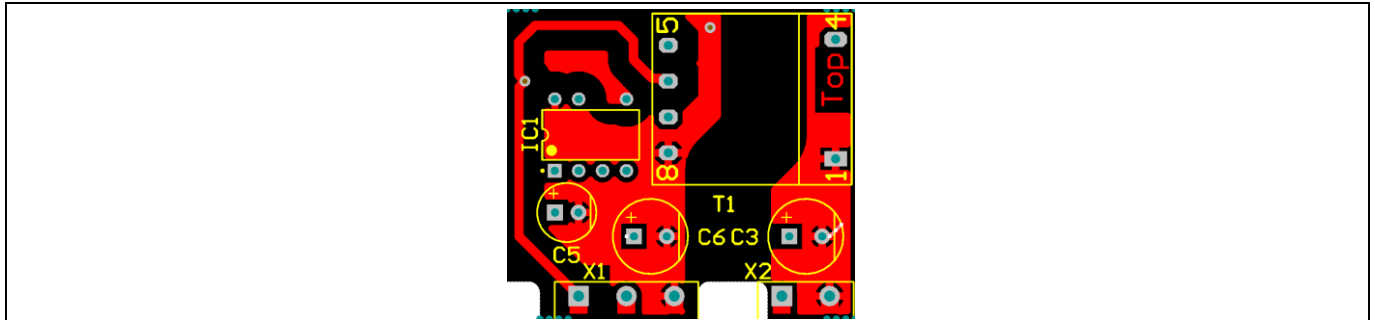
View of the auxiliary power supply daughter card – PCB top layer
